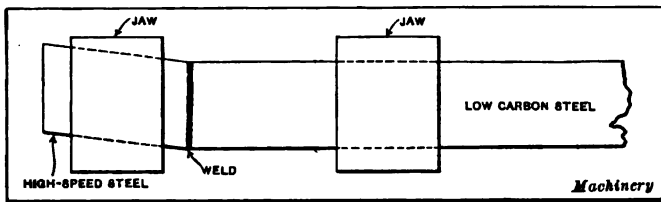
Showing the Proper Relation of High-speed Steel and Low-carbon Steel Stock in the Welder Jaws
